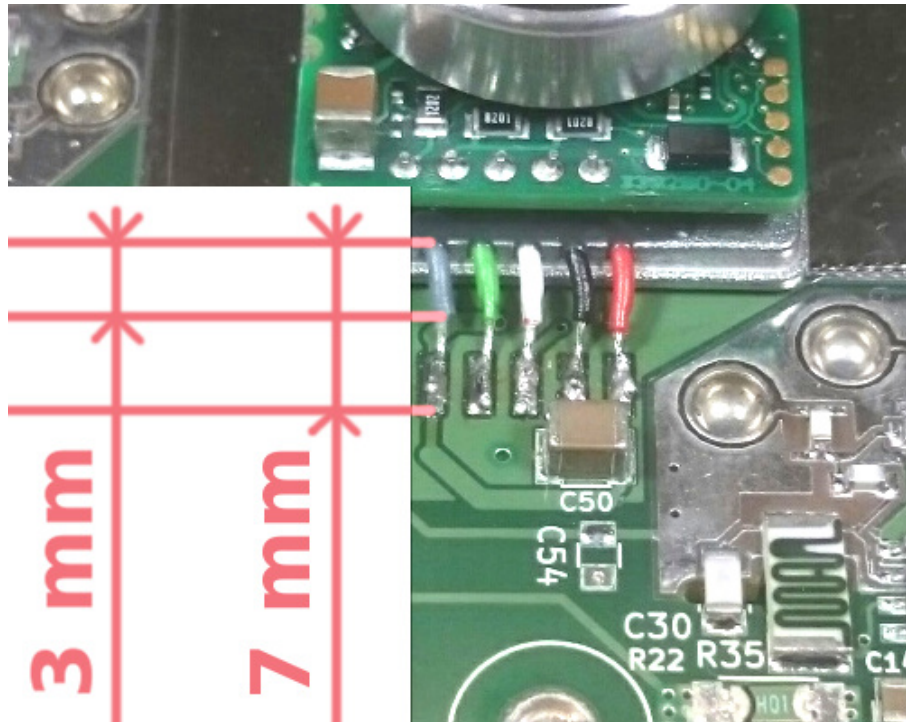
Motor wires soldered to their pads. Wire and insulation lengths marked.
